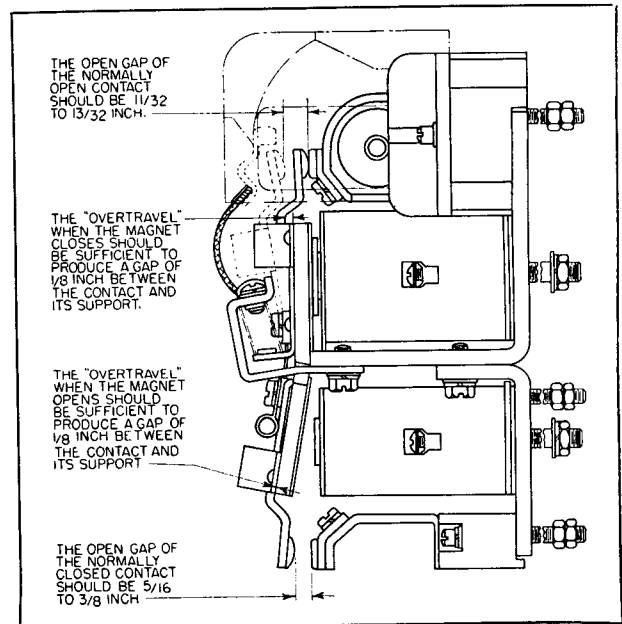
Partially Cut-away View of Type M-211-2H Contactor
